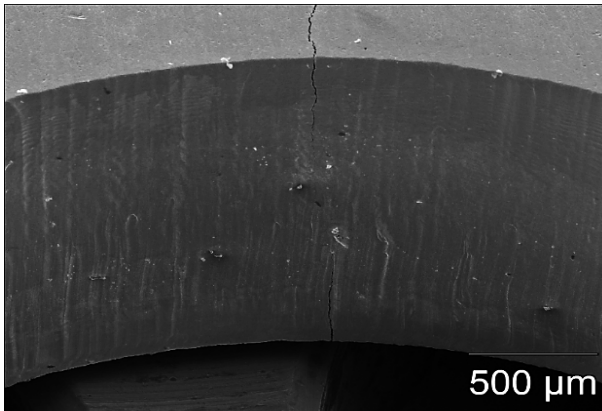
Crack in cross-section of a sample made of 1.4301 steel
